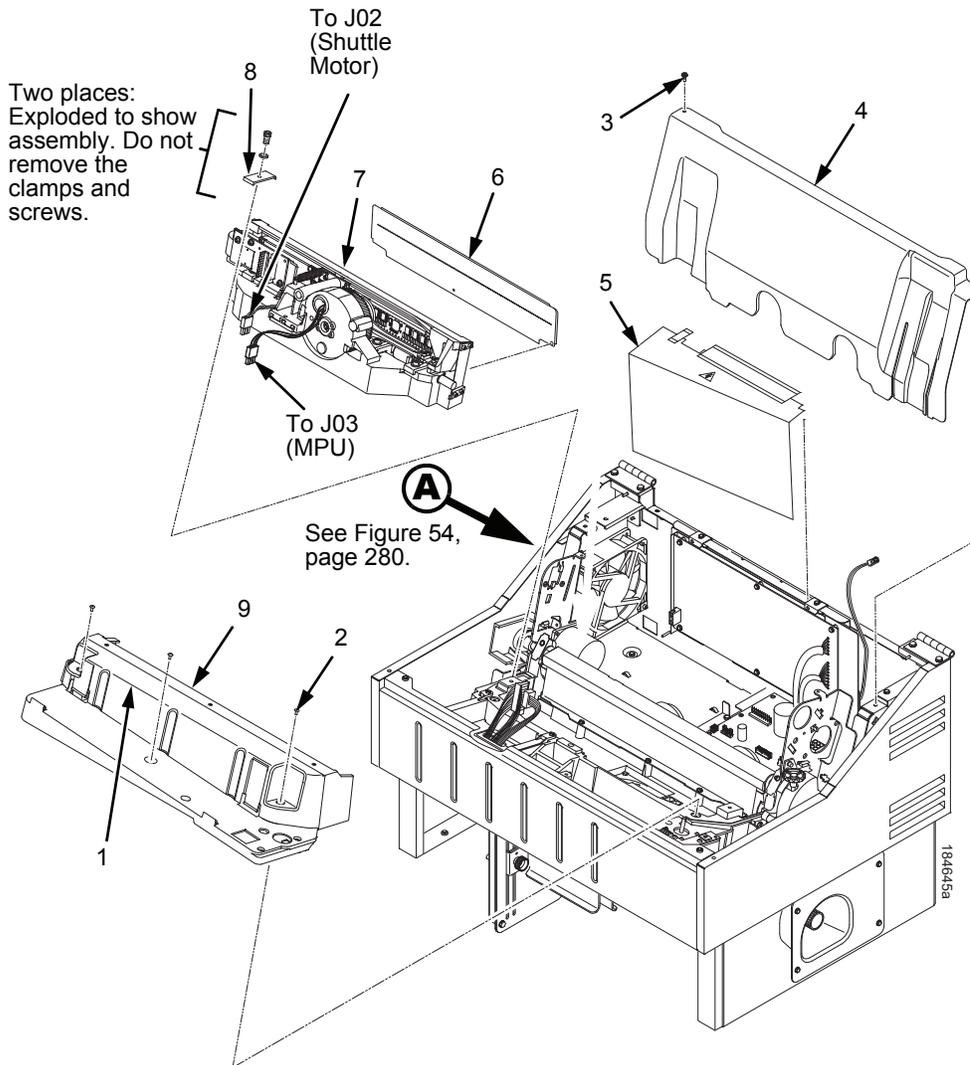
ZTP Inside Covers, Barrier Shield, and Shuttle Assembly
